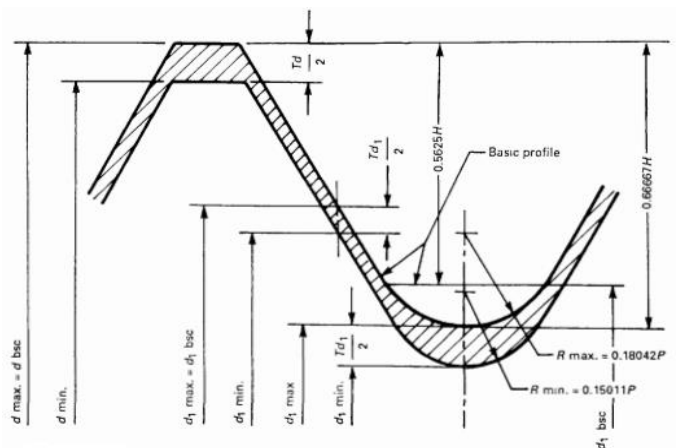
External UNJ thread design and tolerances [14]
